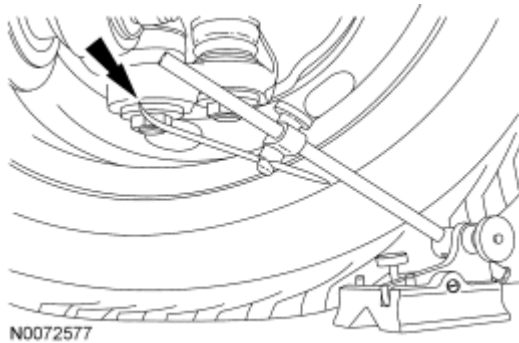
Adjusting Gauge's Arm Until Scriber Point Is Located At Wheel Knuckle's Lowest Point
